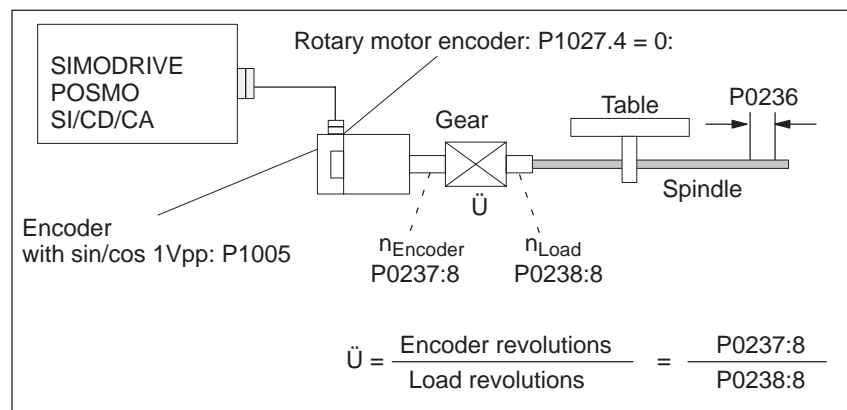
Linear axis with rotary motor encoder (ballscrew)
